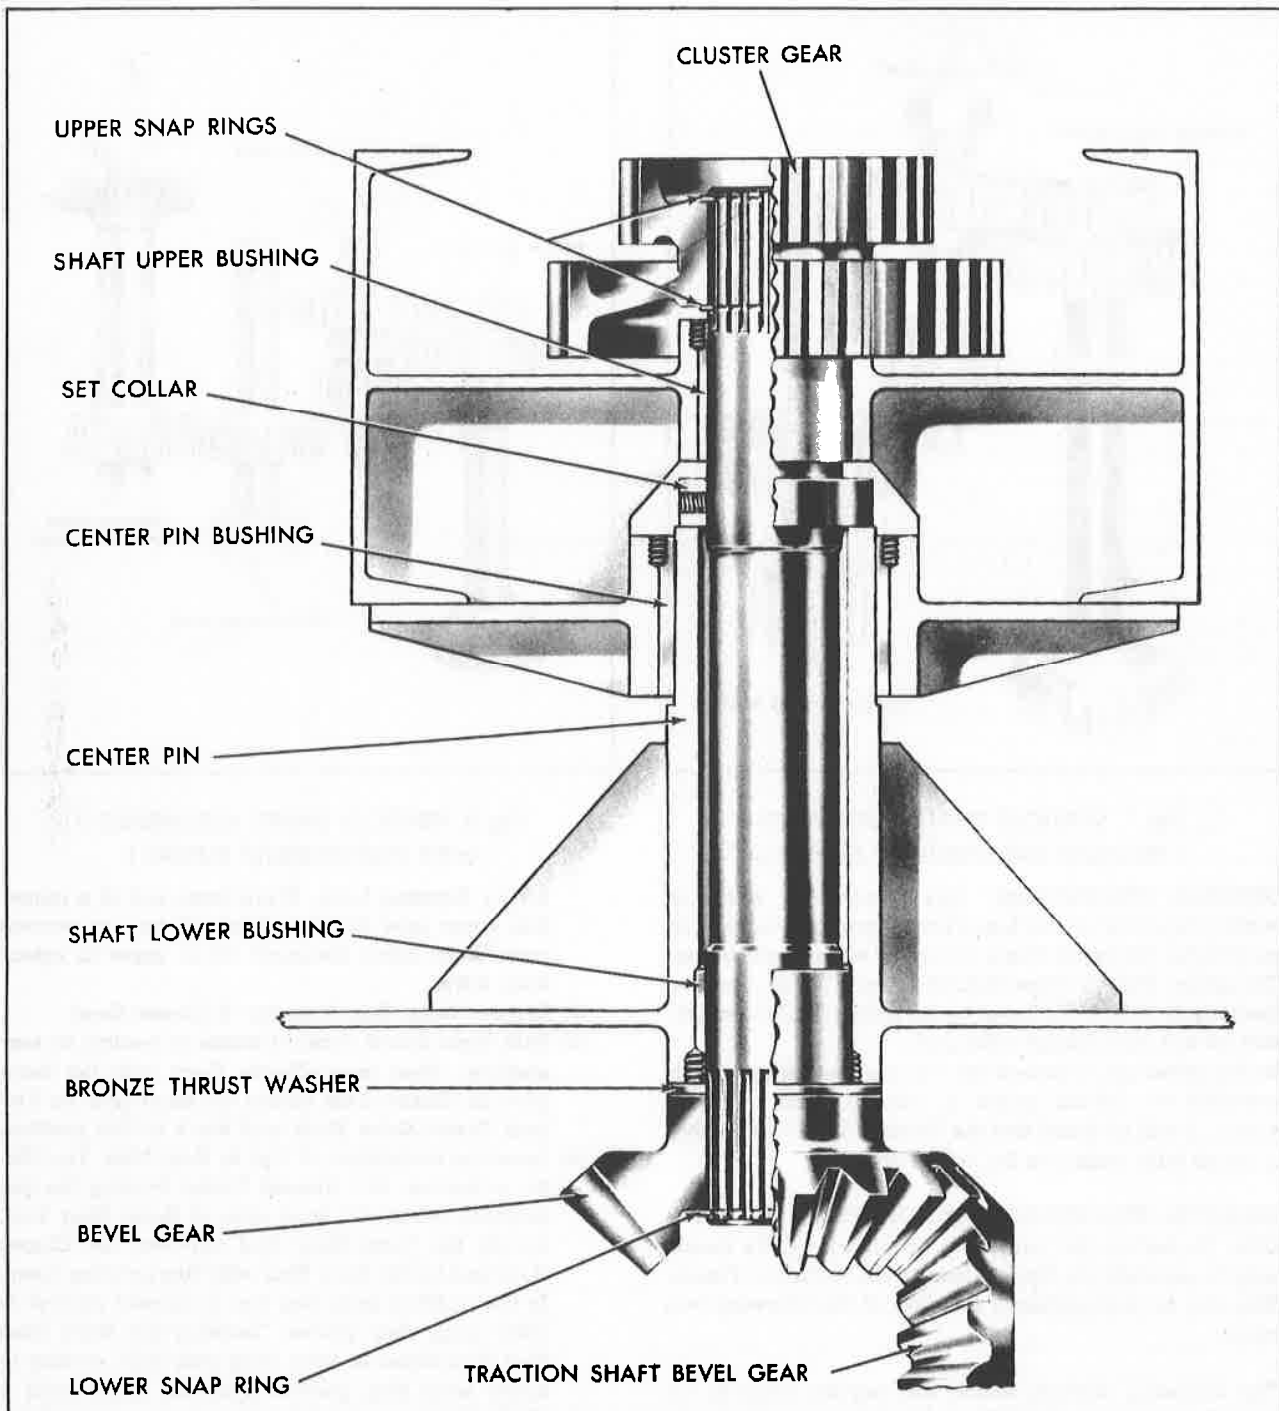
VERTICAL QUILL SHAFT and CENTER PIN
